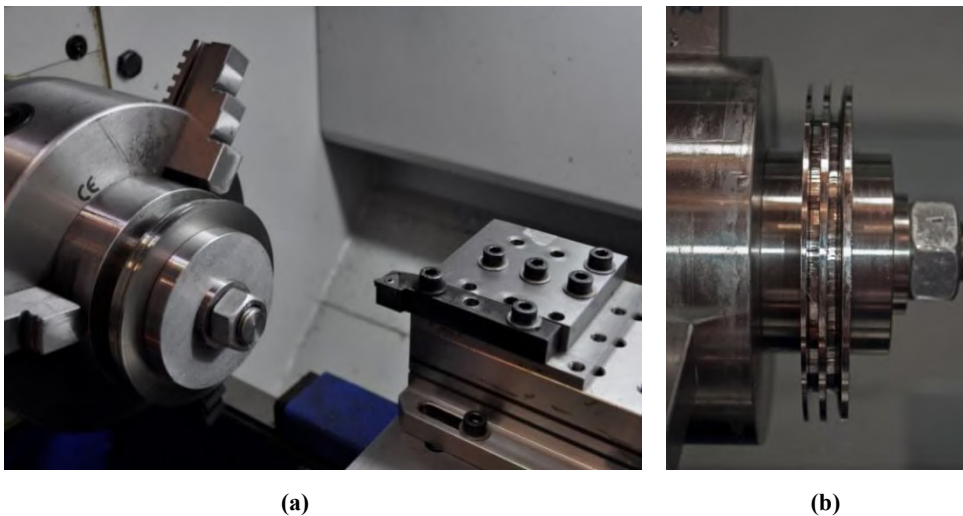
(a) Photograph of the machining tool and the dynamometer. (b) Photograph of the Inconel Alloy workpiece.
